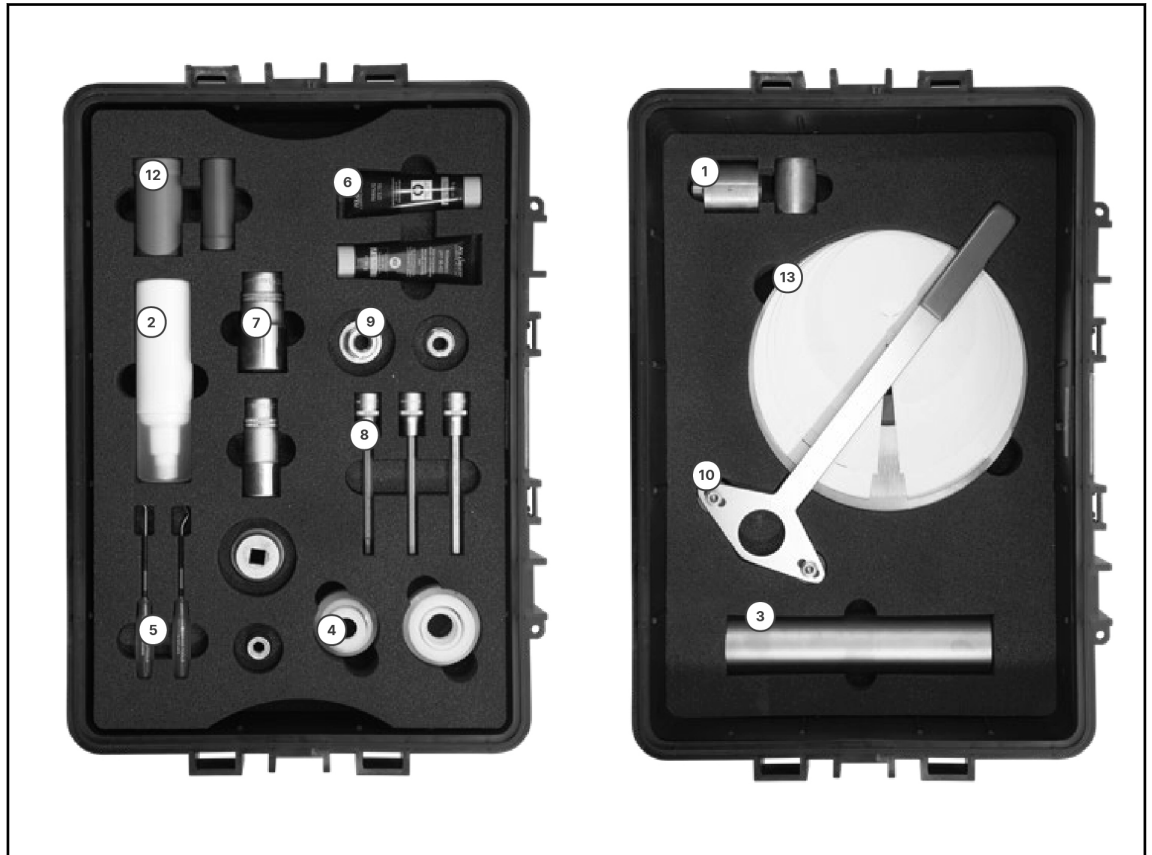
Tools in the GEA Hilge assembly tool kit
